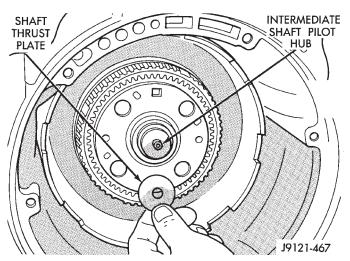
Installing Intermediate Shaft Thrust Plate—46RH
